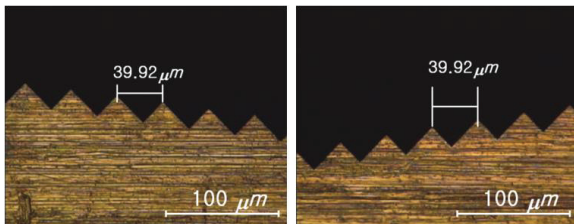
Size of machined micro prism pattern on sinusoidal surface
